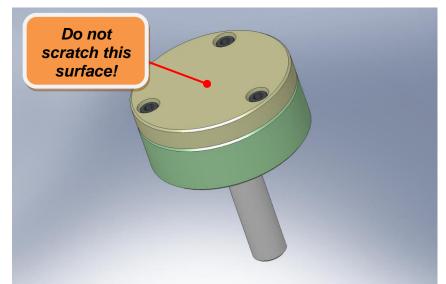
Screw Sensor Target to top of Sensor Target Body. This is the Position Sensor Target Face Assembly (D071462).
